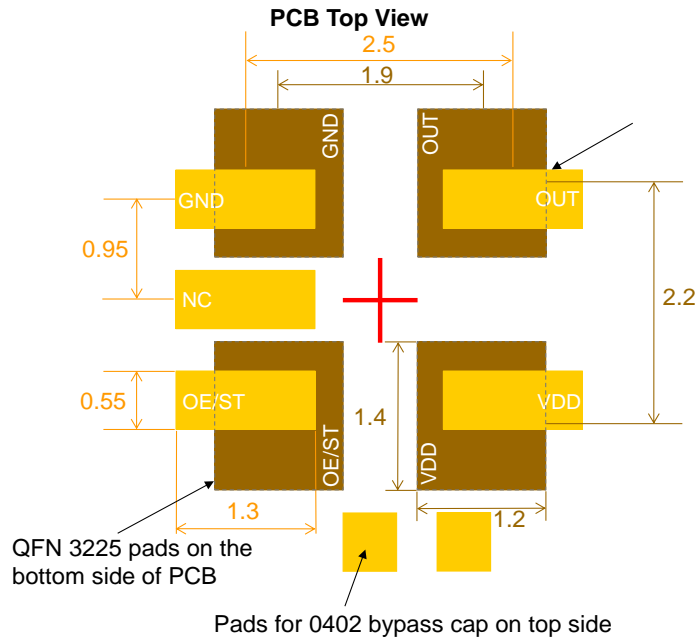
QFN 3225 and SOT23-5 stacked design land pattern
